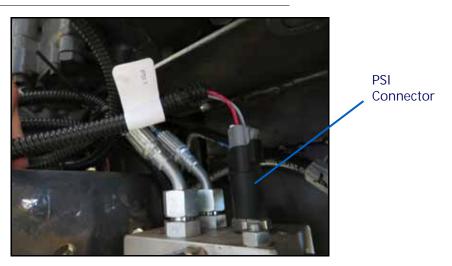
Valve Harness Connected to the Hydraulic Steering Valve
